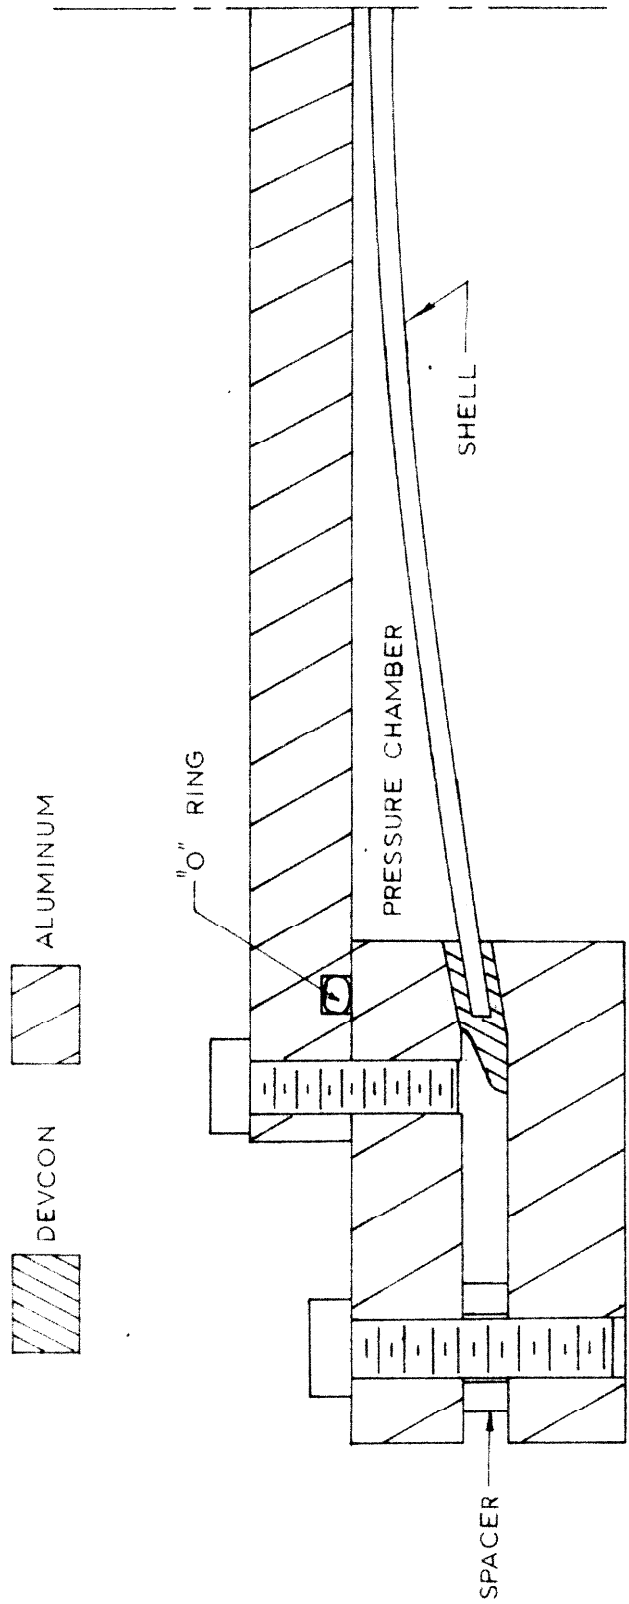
DETAIL OF ASSEMBLY OF SHELL AND RING
